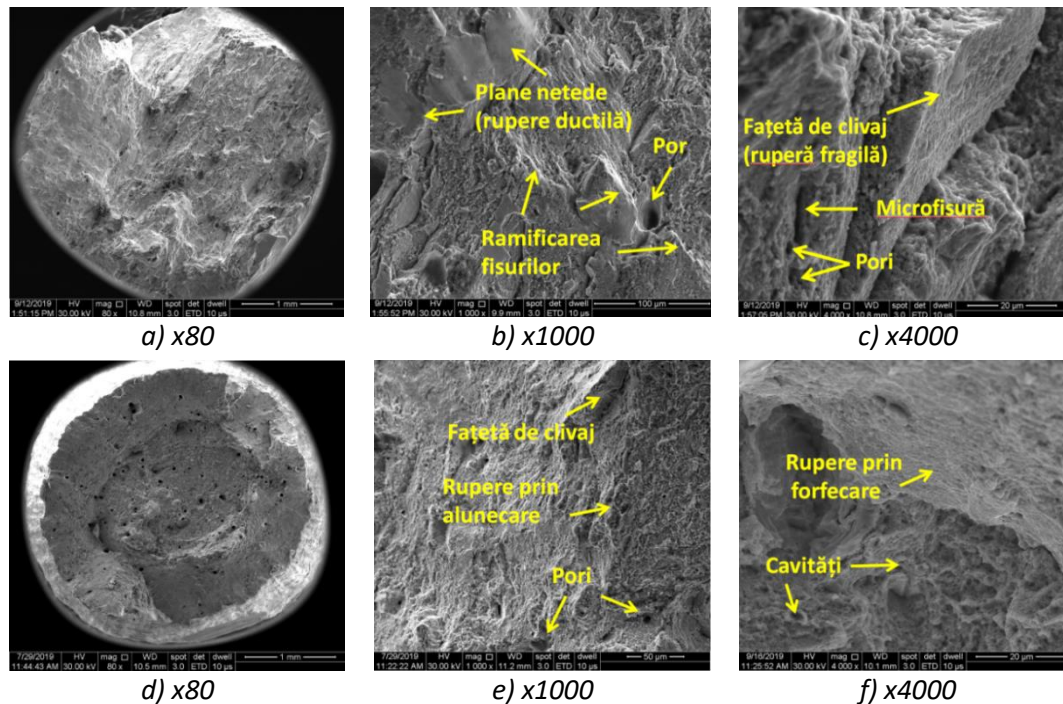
Fracture surface of additively manufactured specimens: (a-c) in the horizontal plane and (d-f) in the vertical plane
